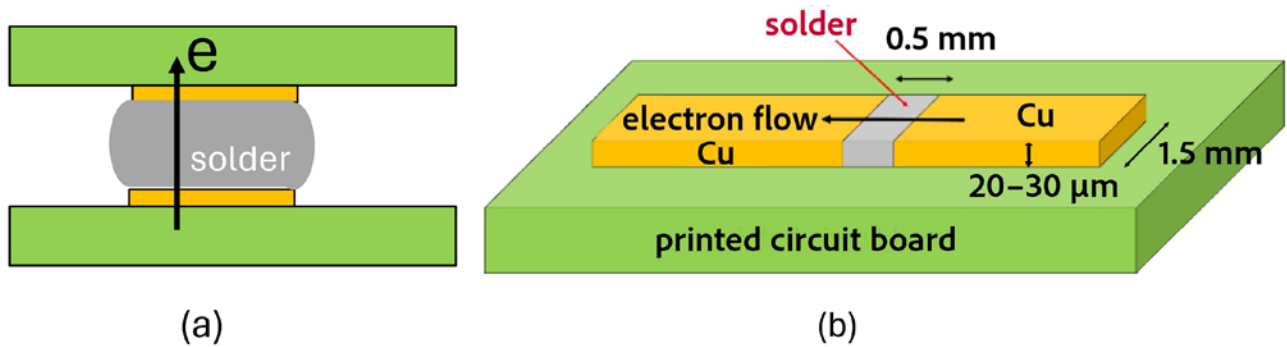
a) BGA solder joint between a PCB and a component; b) planar solder joint on a PCB.
